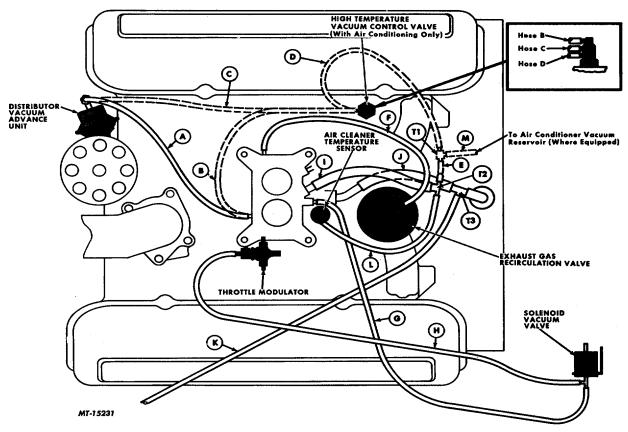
Vacuum Hose Location--For 1210 Pickup through 1510
